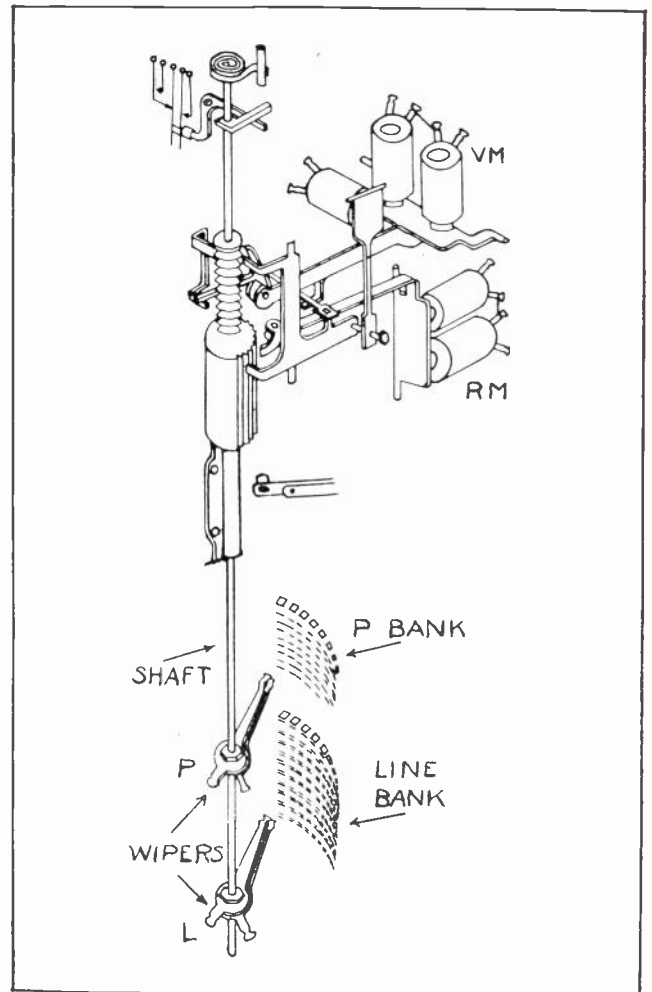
This diagram shows the arrangement of the selector mechanism with its vertical magnets, rotary magnets, wipers, and wiper shaft.
